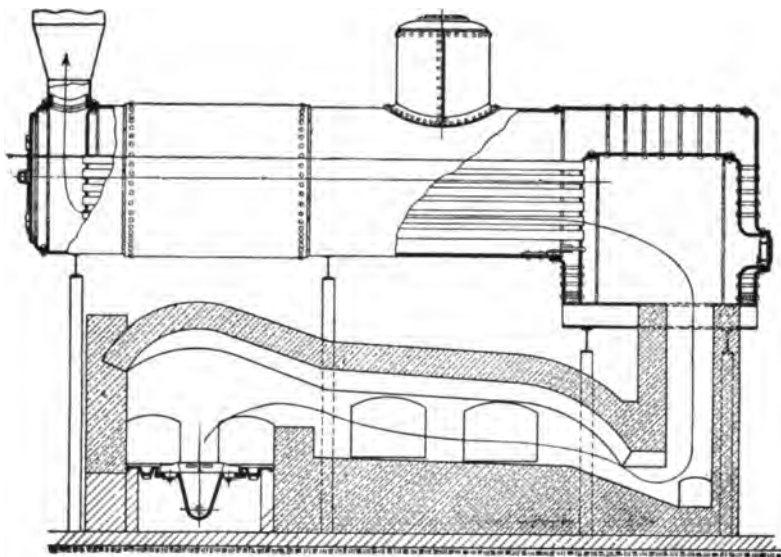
Underfeed stoker, Jones model, as applied to a furnace for heating forgings. This furnace is equipped with a waste-heat boiler.
